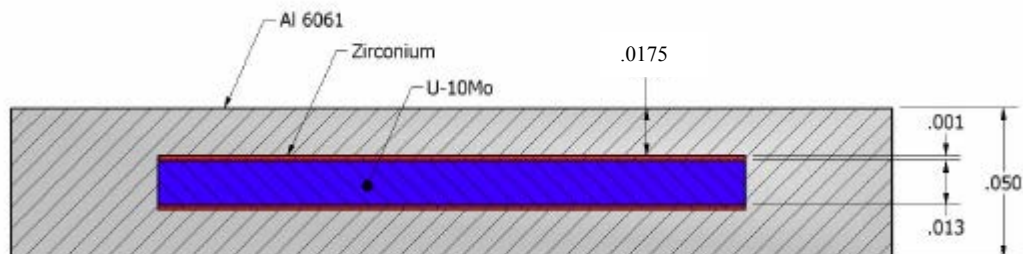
U-10Mo Fuel Plate Cross-sectional View for a 13 mil Thick Fuel Meat
